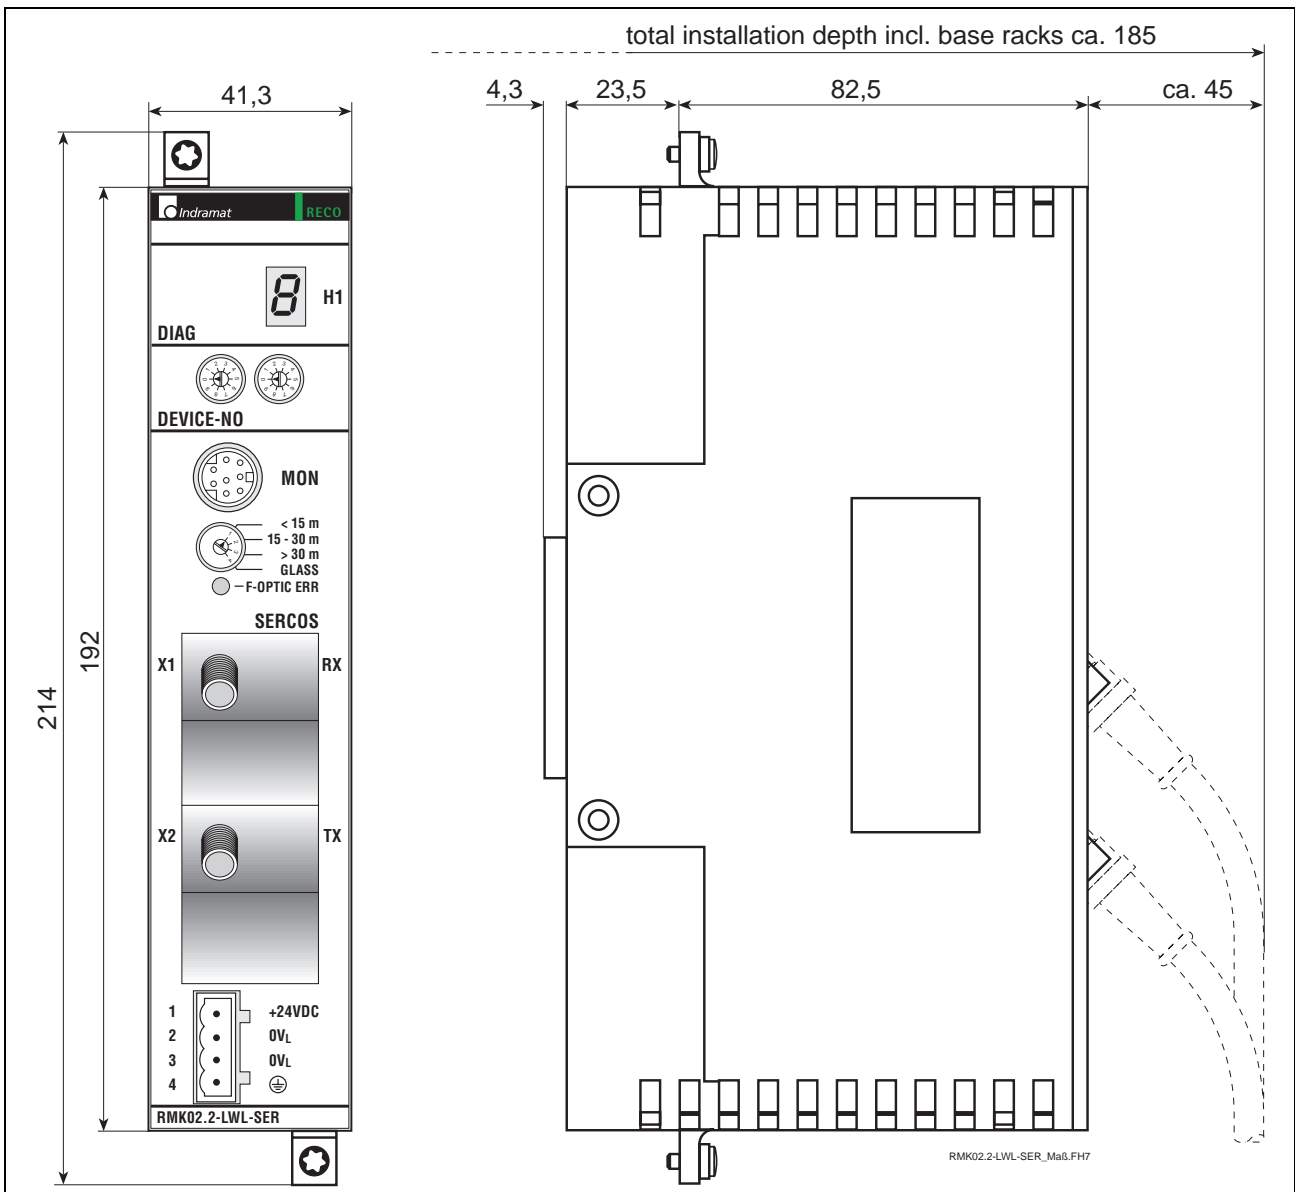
Mounting dimensions of RMK02.2-LWL-SER
